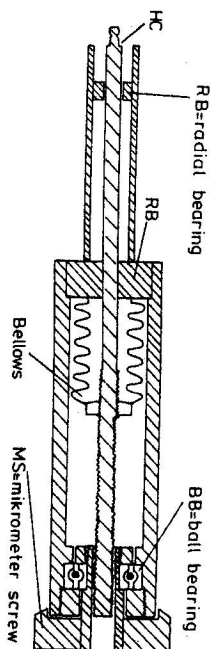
Shift mechanism. HC—connection to the hollow cathode.
